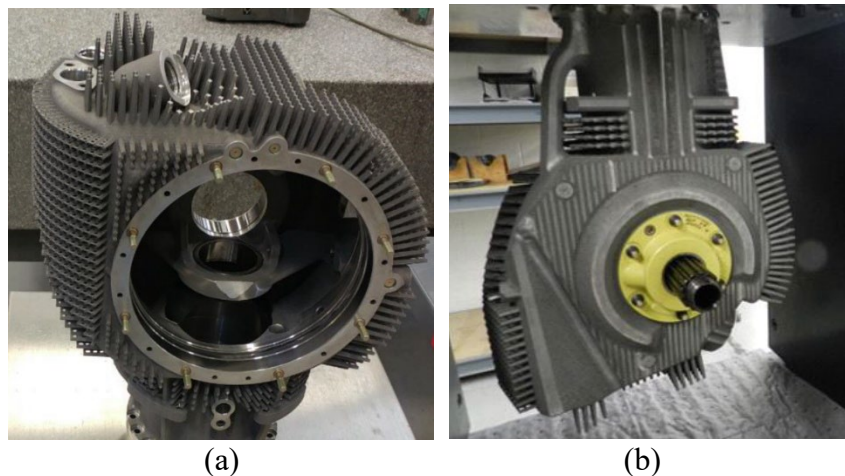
AM gearbox housing at different stages during assembly: (a) after machining and hardware installation and (b) completed gearbox assembly.⁷
